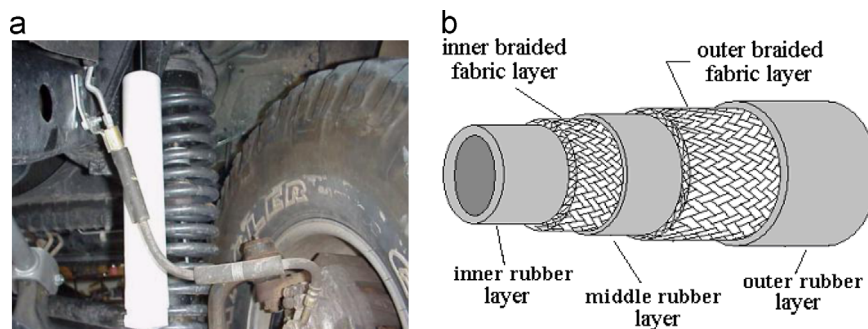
High pressure braking hose: (a) assembled configuration, (b) layer-wise material composition.
